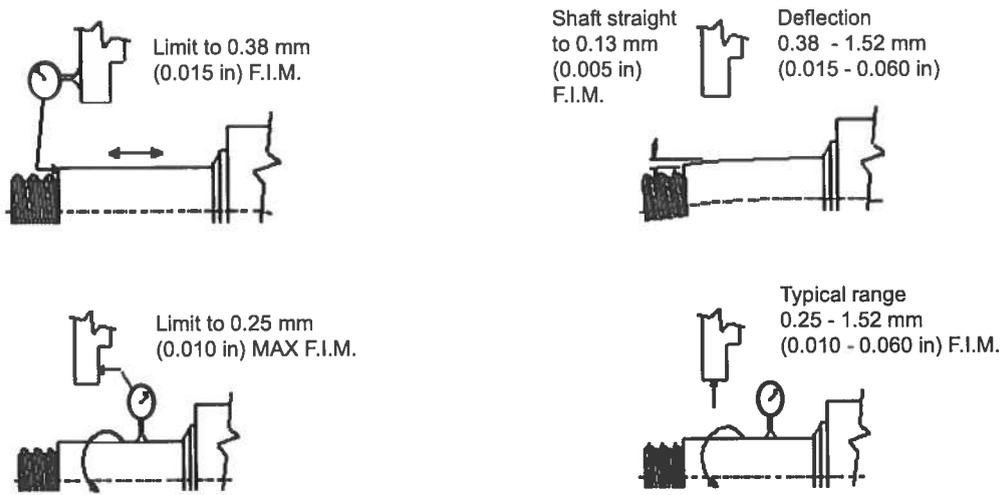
Slurry pump shaft alignment and runout
